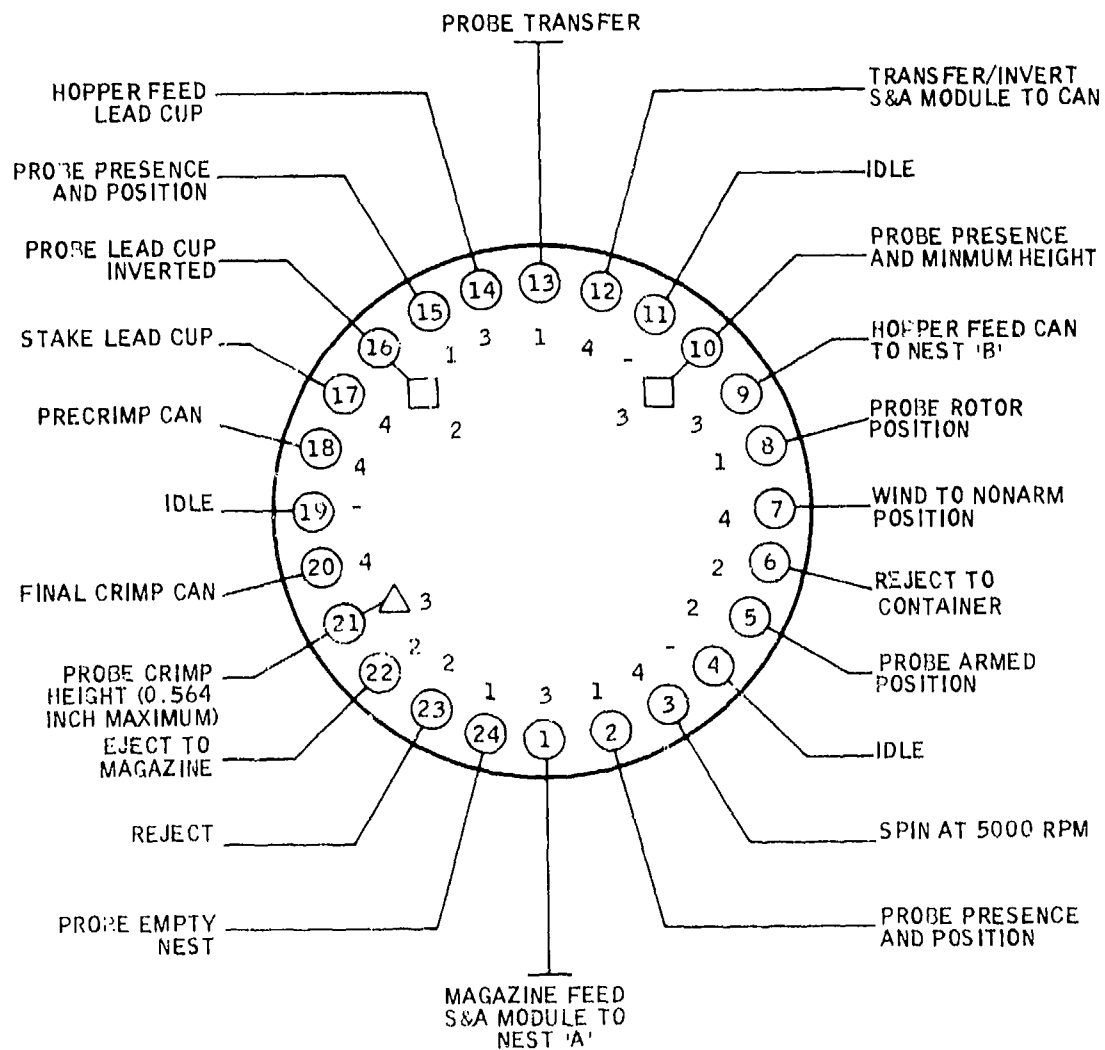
Dial schematic, machine S8 - S&A module subassembly operation 2 (lead cup)
